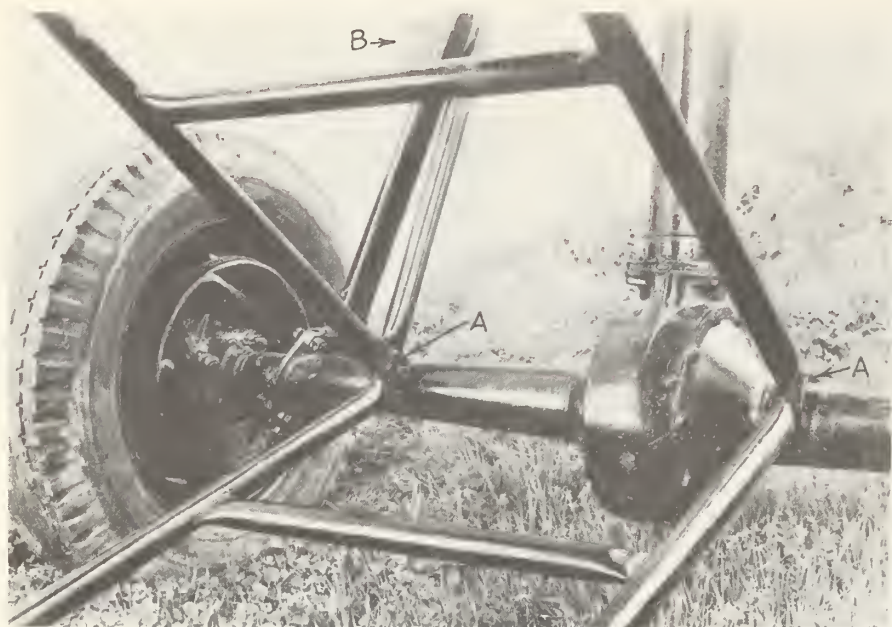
Braces attached to the rear axle. A, Anchor lugs welded on the rear-axle housing to attach chute and platform braces. B, Rear spreader-bar bracket on radius rod.
